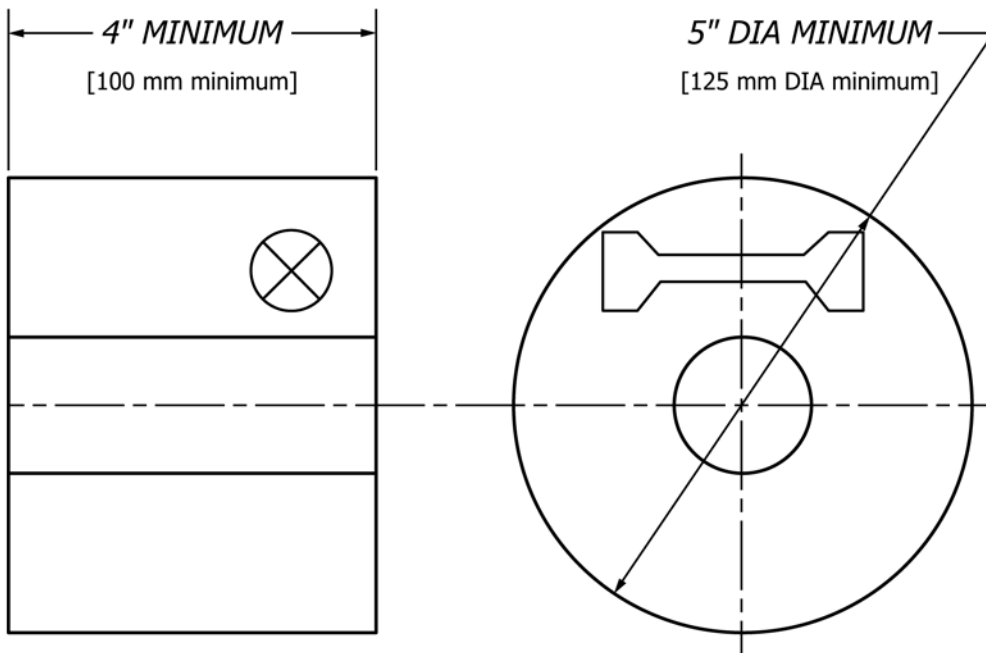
Configuration of Cast Centrifugal Test Block with Potential Locations of Machined Test Specimen.
